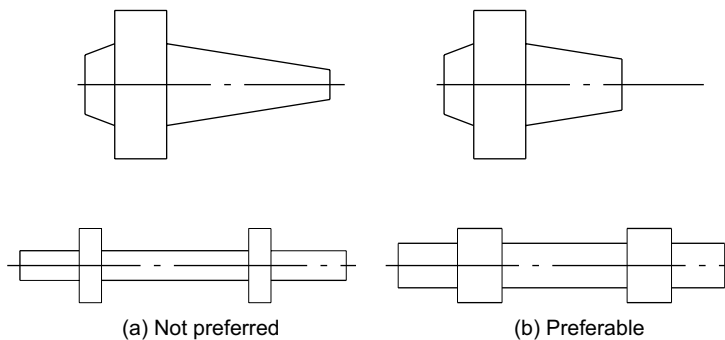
Parts to be machined should be rigid enough to withstand the cutting forces
